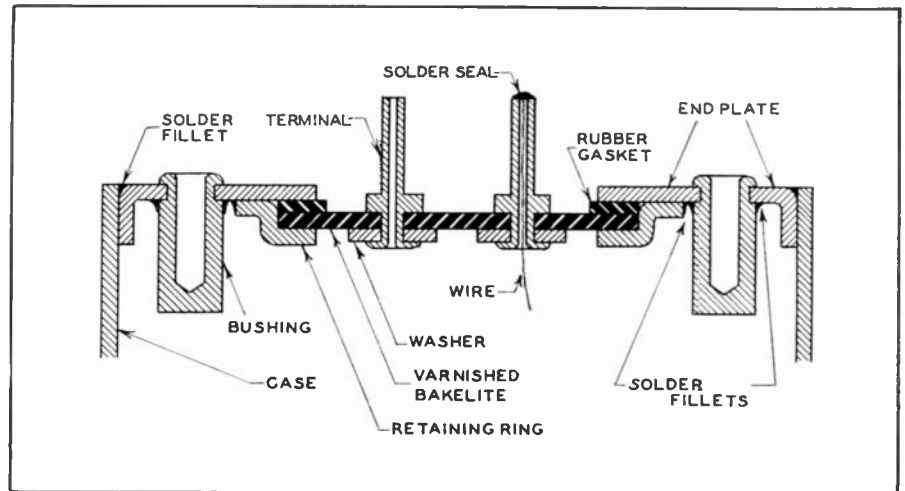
ENLARGED CROSS-SECTION OF SEALED END-PLATE CONSTRUCTION
